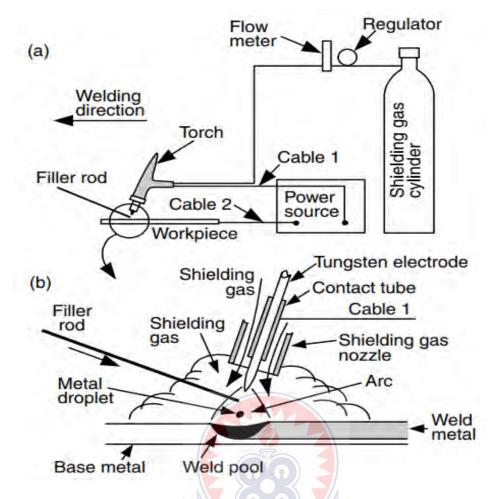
Gas-tungsten arc welding: (a) overall process; (b) welding area enlarged
